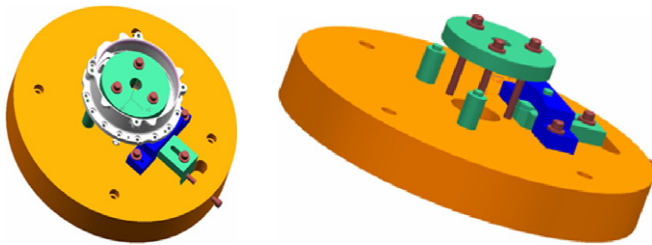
Machining fixtures of aircraft-used bearing housing.
